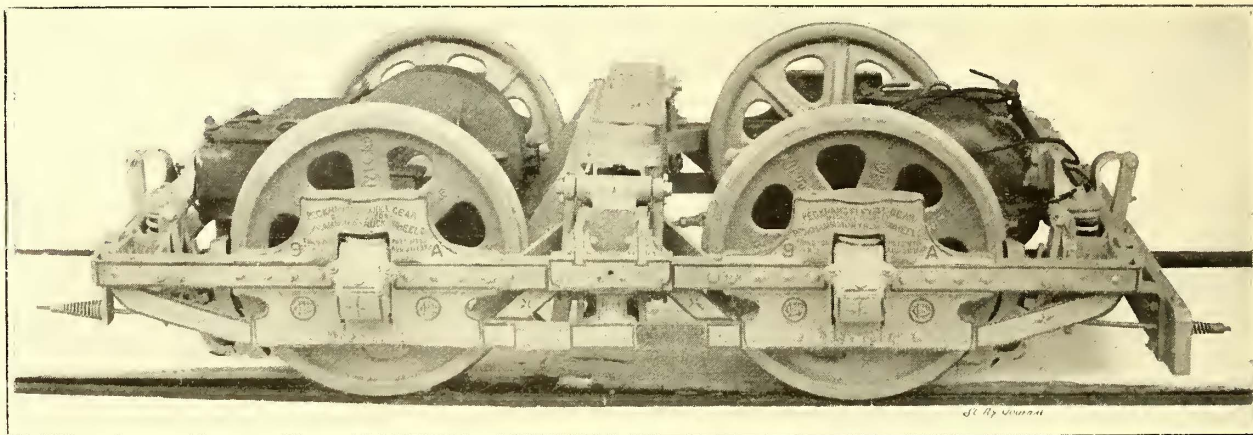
NO. 14B SHORT WHEEL BASE DOUBLE TRUCK
